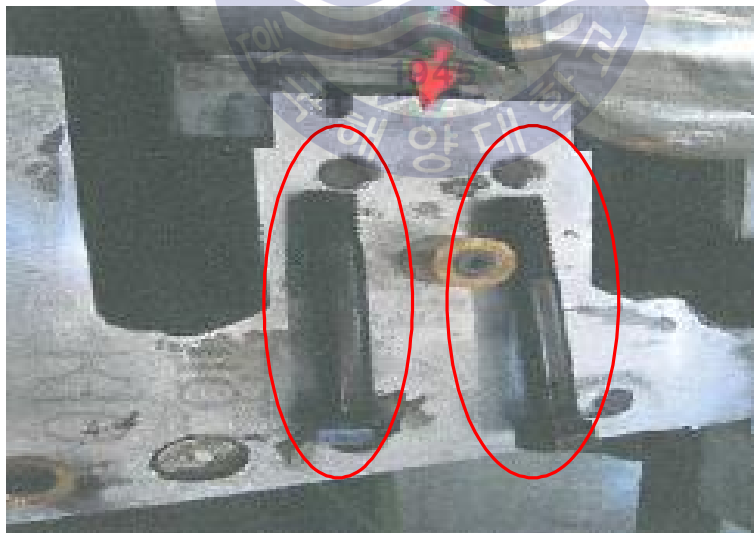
Fracture of clutch input shaft bearing bolts by extended crack
